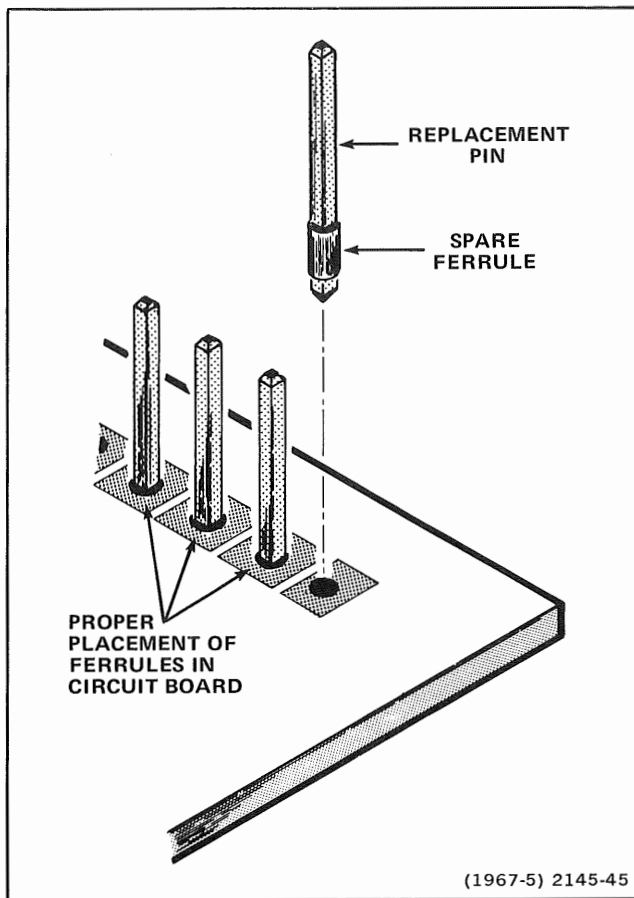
Exploded-view of circuit-board pin and ferrule.
